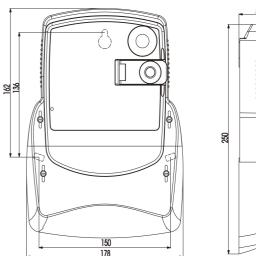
Overall and fixing dimensions of an MT371 meter fitted with a long terminal cover
